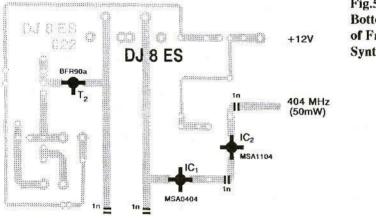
Bottom Layout of Frequency Synthesiser PCB
